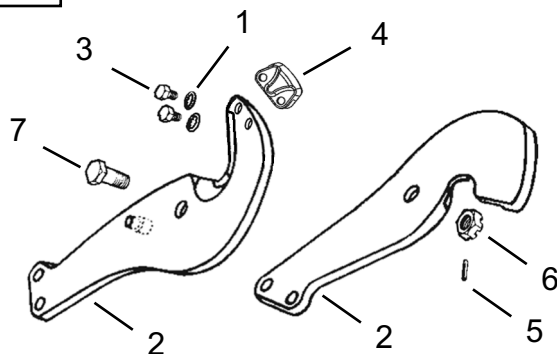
Illustration "A": 8690 Series Ratchet Type Cutters Handle Assembly
